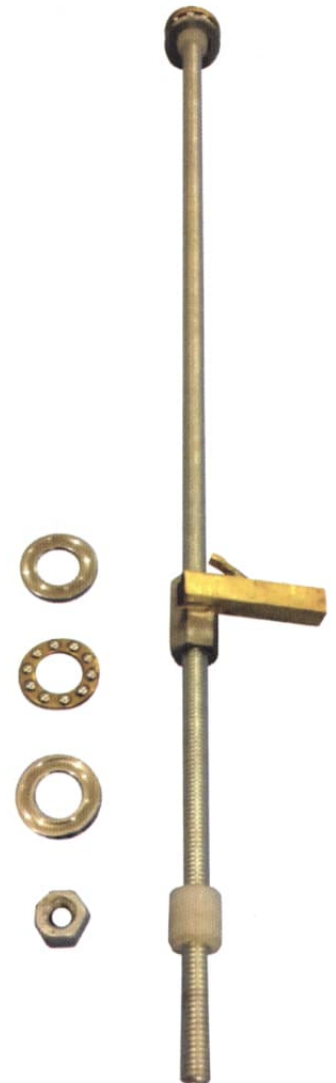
transverse - parts lead nut and screw with spacers fitted also thrust bearings
